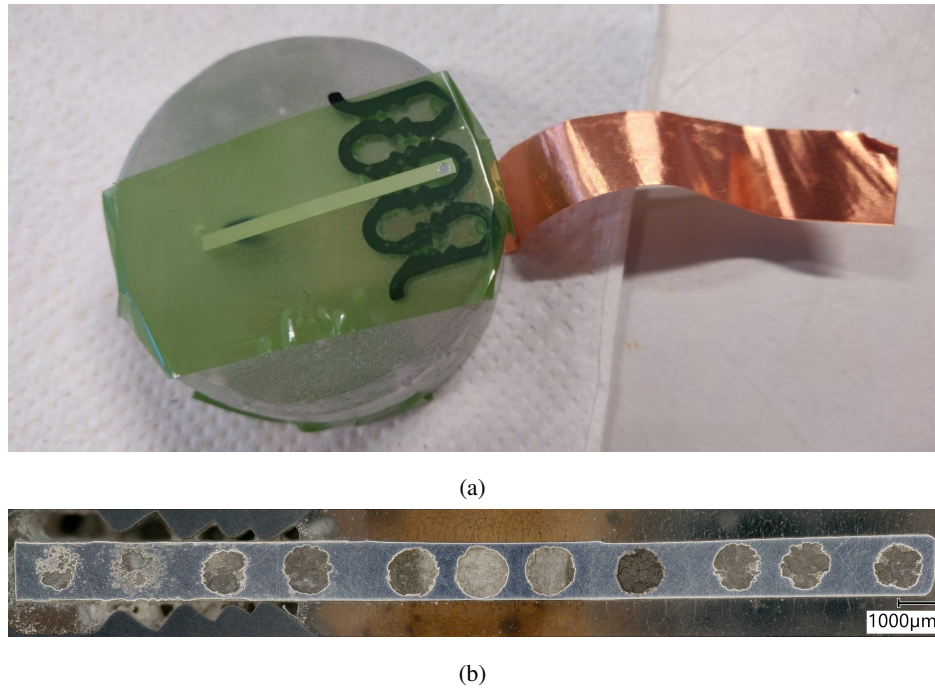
(a) A prepared sample of an embedded rectangular specimen to which green tape (with a 1 mm extruded hole) and copper tape are adhered. The top surface is the LT-ST cross-section of the weld. (b) Test locations on the weld cross-section, with the RS on the left and the AS on the right of the image.
